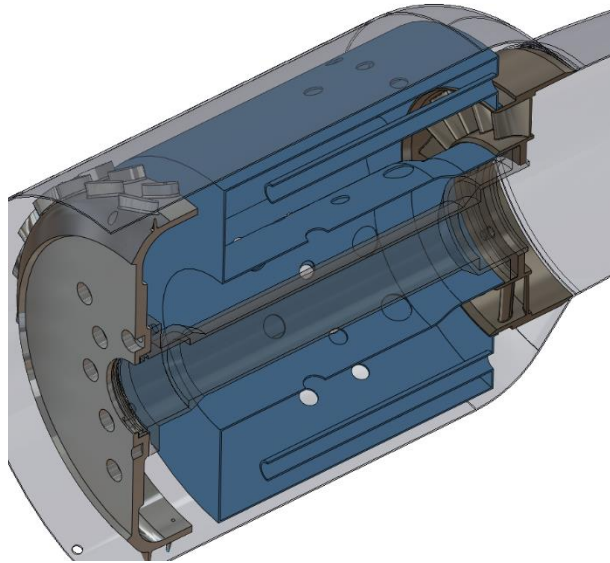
Perspective, cross-sectional view of the installed combustors for Design G showing the Installed NGV at the combustor outlet
